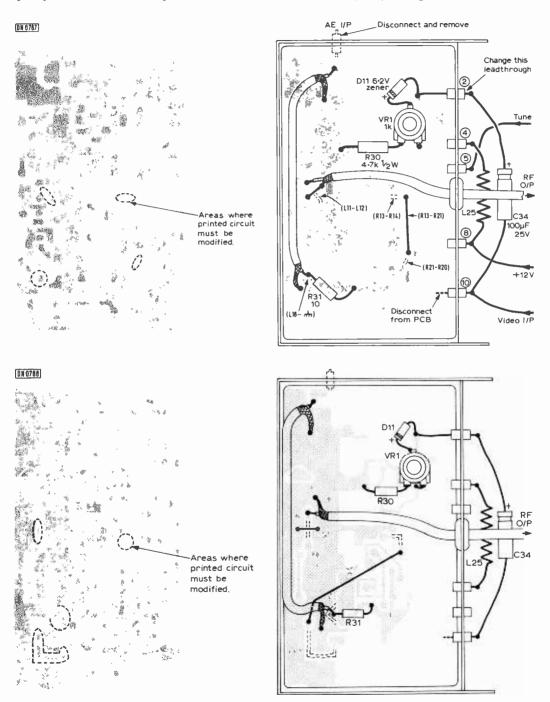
Layout of the printed boards and modification details for the ELC1043/05 (top) and ELC1043 (bottom). In each case the left-hand drawing shows the print pattern before modification. The right-hand drawing shows track and components to be removed in broken lines, links and components to be added in full lines. Links should be made in 16 or 18 swg tinned copper wire, formed to stand clear of the board. External connections are identical for both versions.
